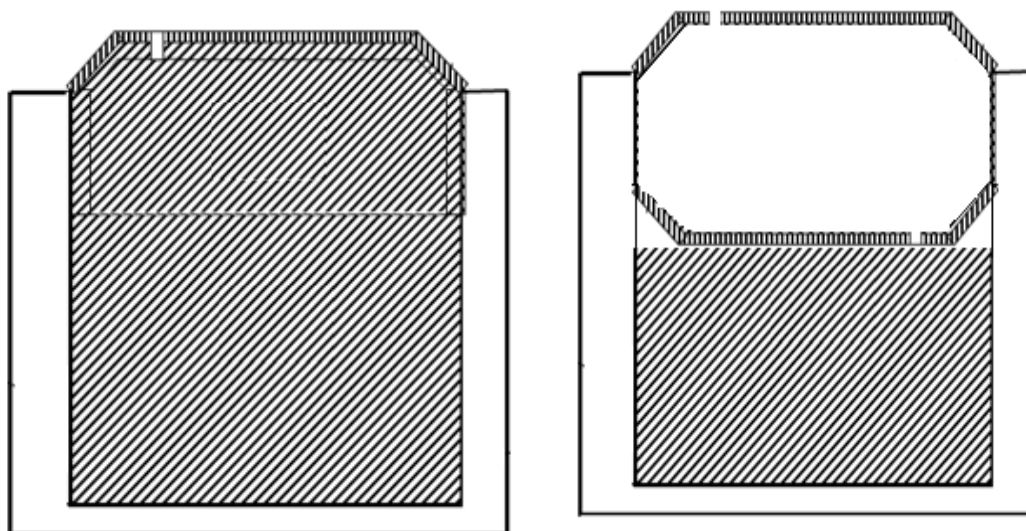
Section Views of the Cap Device (Inserted)
